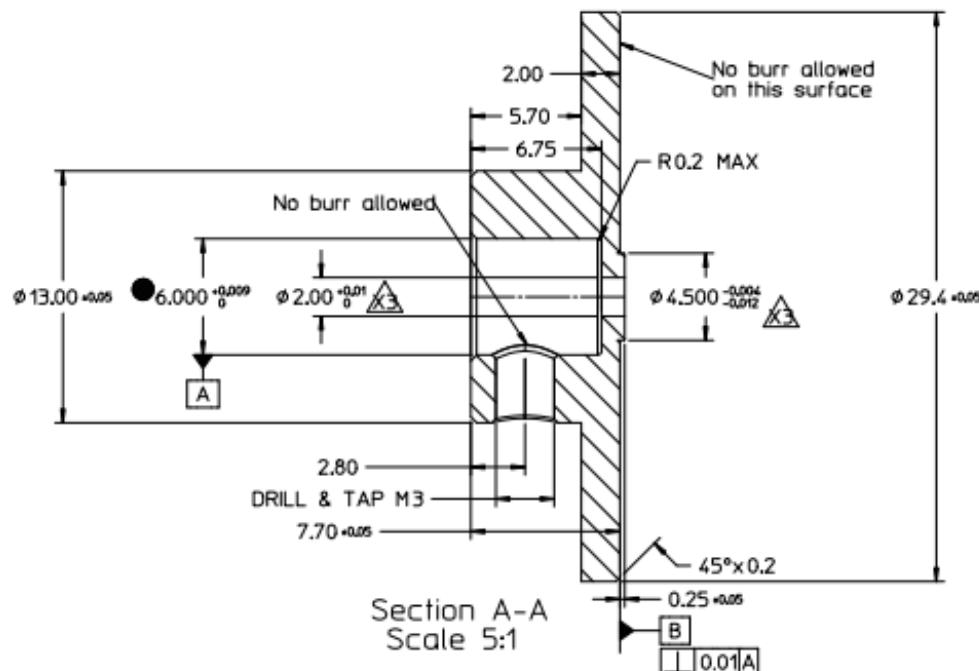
Evaluation Board Sample Mounting Bracket and Bearing Stage
